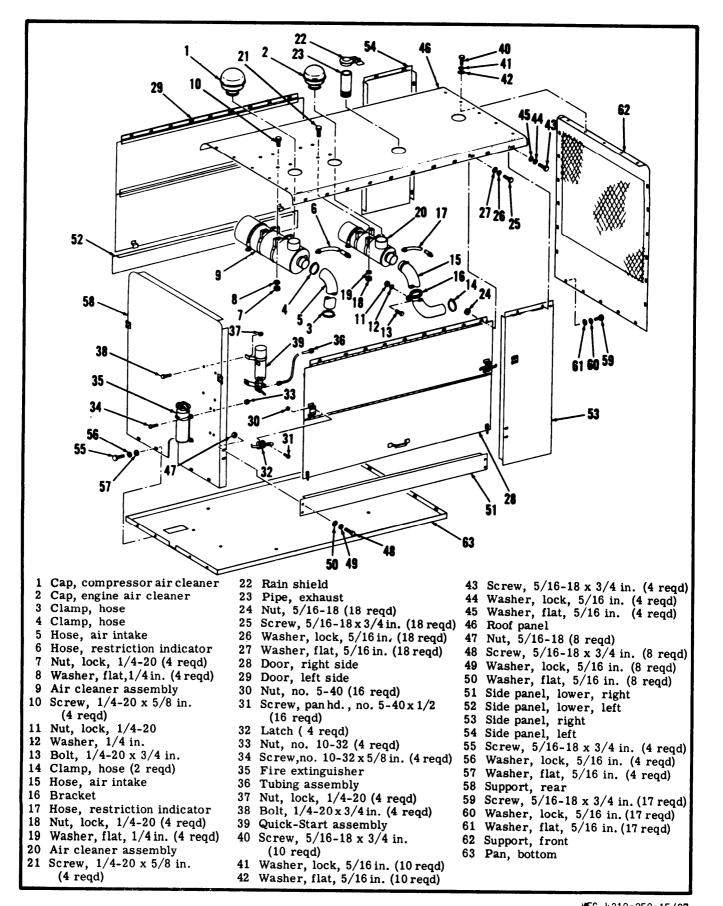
Housing, Doors, Hood, and Panels, Removal and Installation. *EC 4310-250-15/27
